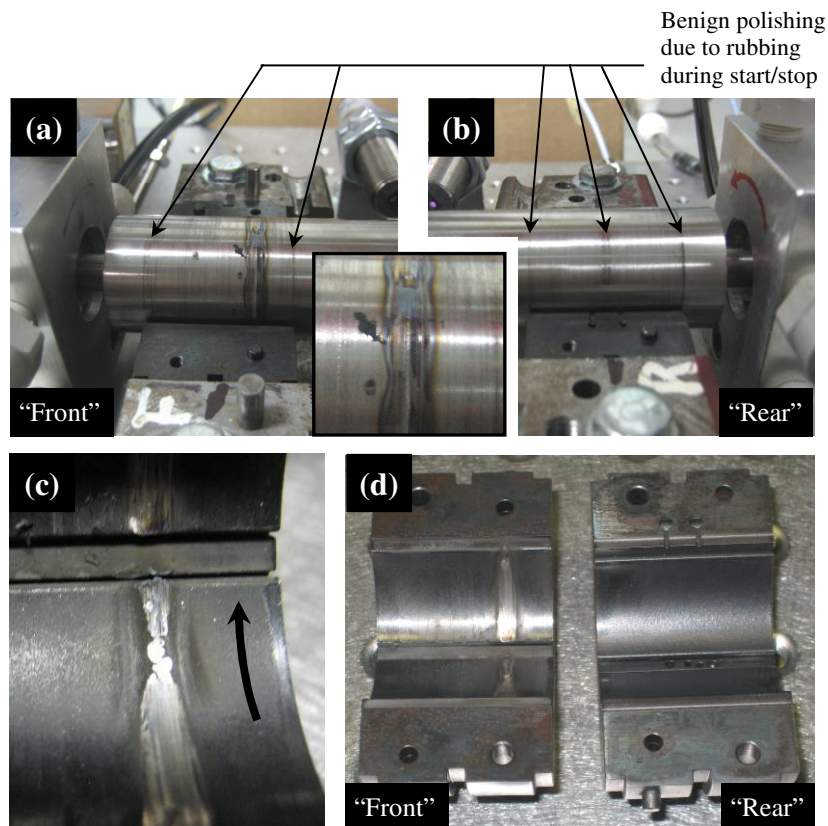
Damaged rotor and bearing after seizure occurred while running at 120+ krpm for extended period. (a) Localized heating and micro-welding on circumference of rotor within “Front” bearing (inset shows magnified view of damaged region). (b) Undamaged rotor within “Rear” bearing. (c) Close-up of damage to “Front” bearing (arrow indicates rotor spin direction). (d) Side-by-side comparison of “Front” and “Rear” bearings to show condition after rotor-bearing system failure.
